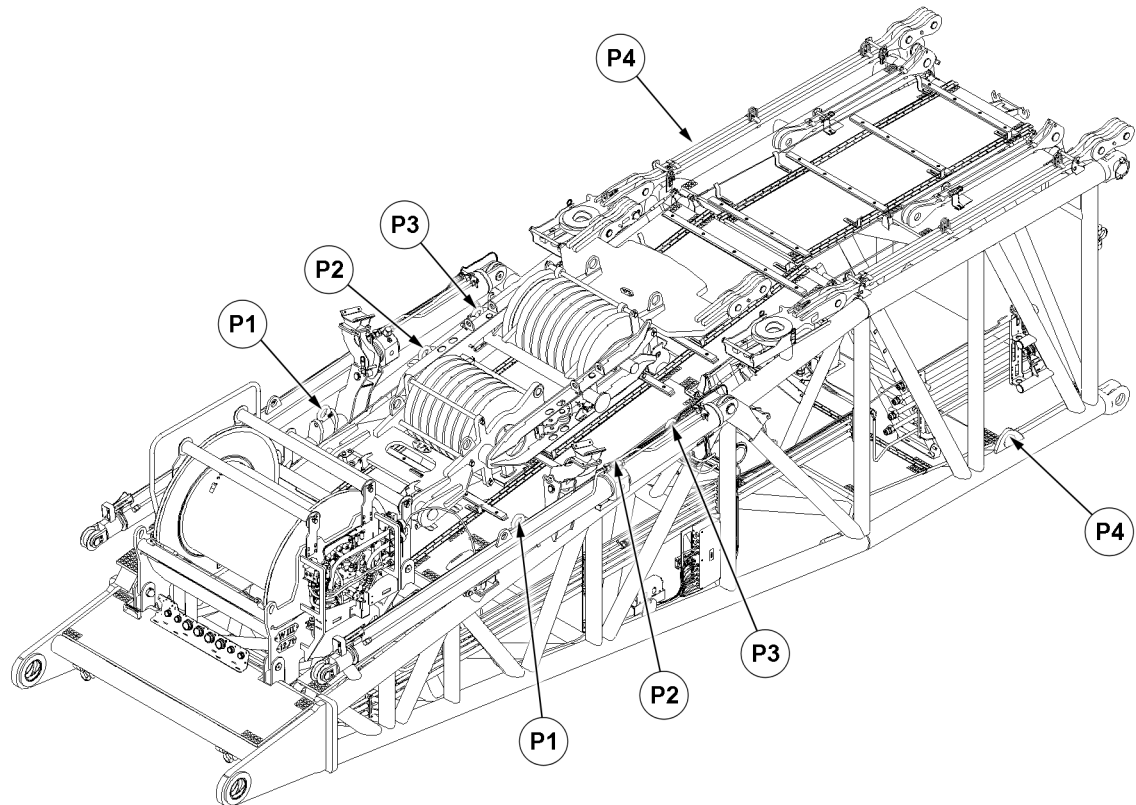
D-pivot section fastening points (illustration with winch 3)
